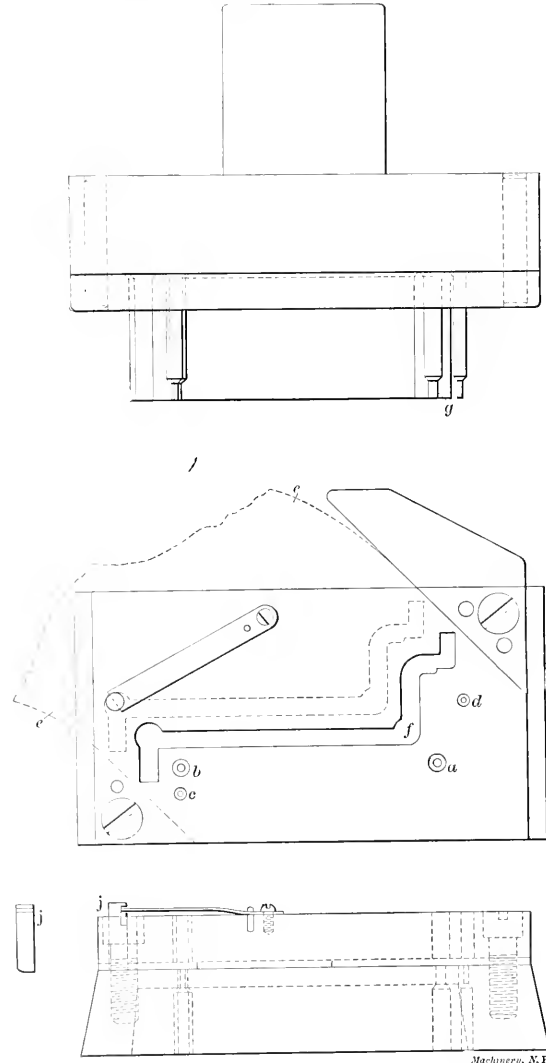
Punch and Die for Making Blank shown in Fig. 1.
